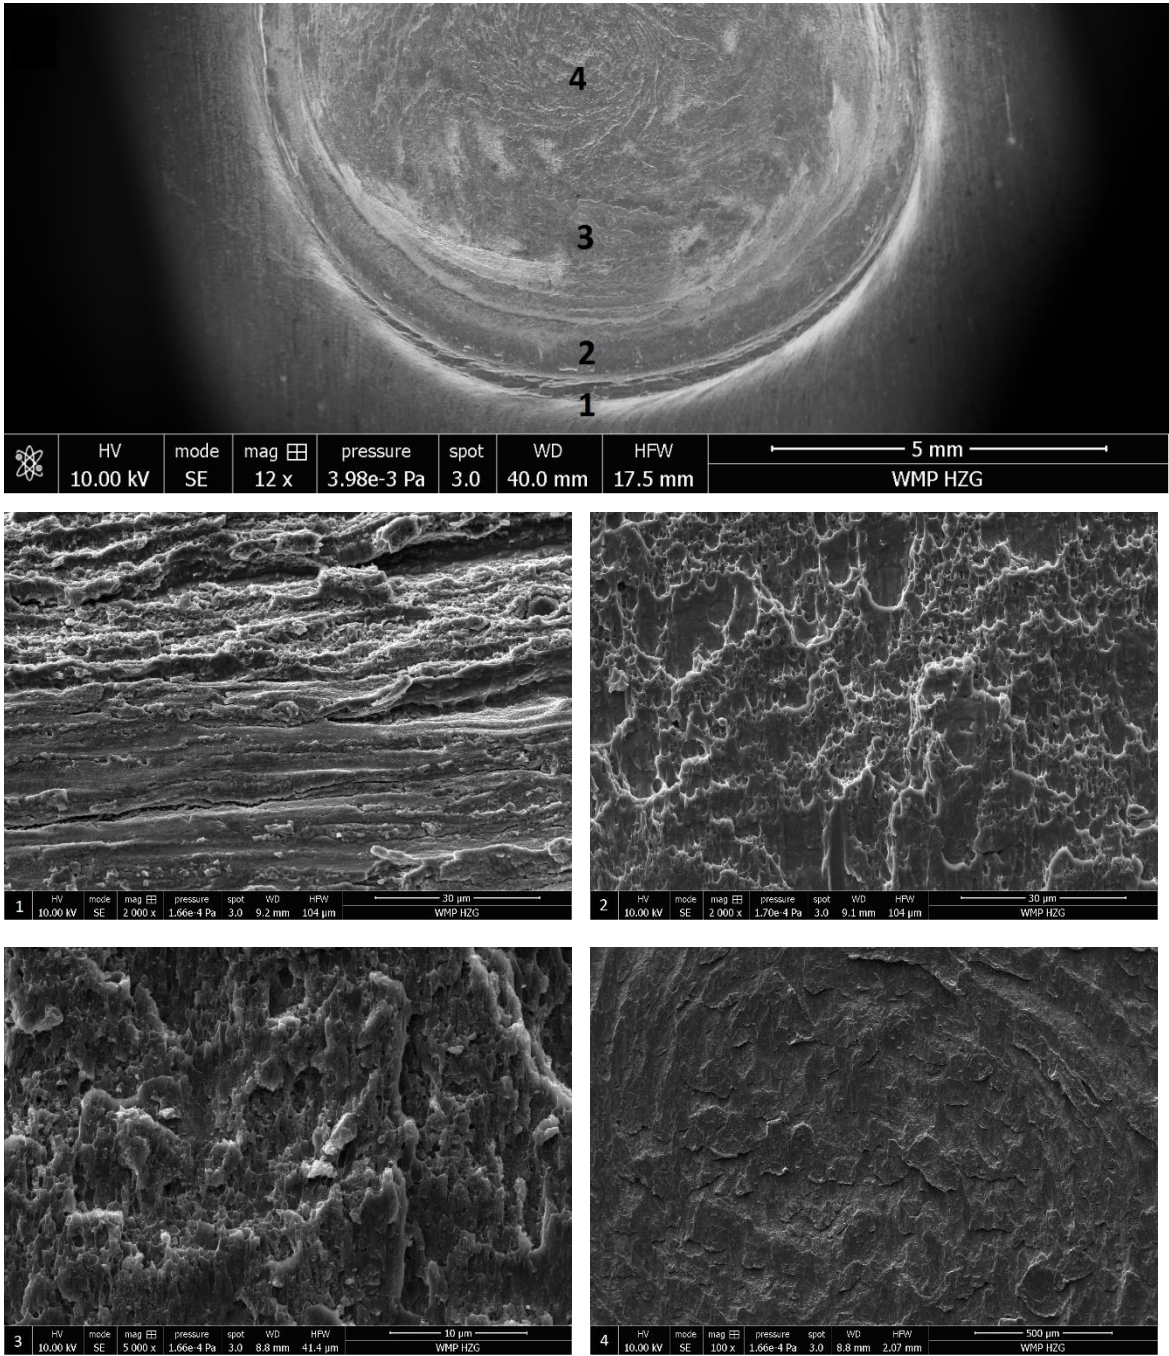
Fractographic Images of the Through the Weld fracture mode in LST (macrograph and details)
